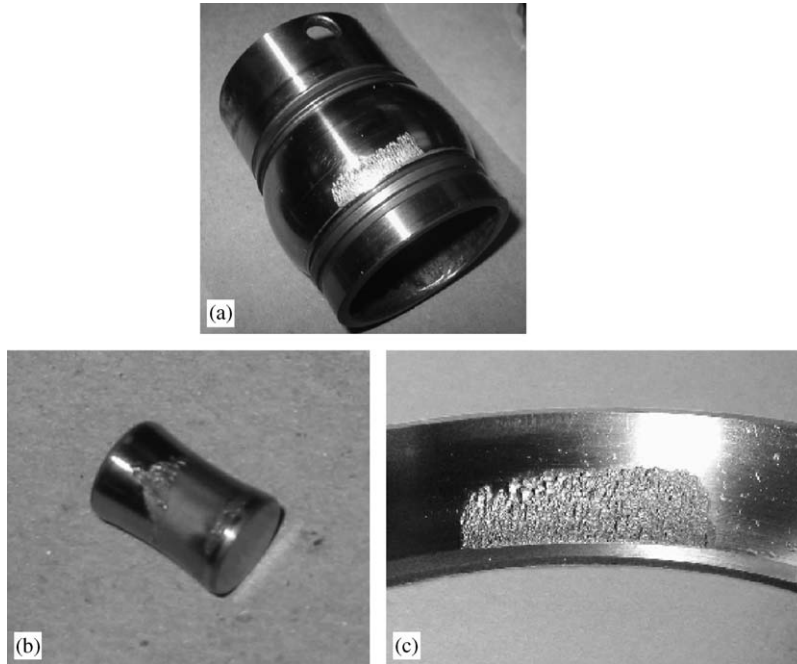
Picture of bearing components after test: (a) inner race defect in bearing 3, (b) roller element defect in bearing 4 and (c) outer race defect in bearing 4.
